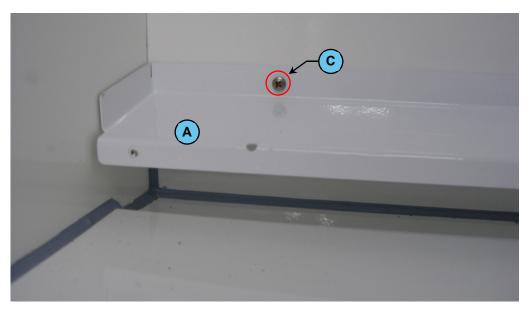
AR Back Wall Plenum Bottom Support Installed
